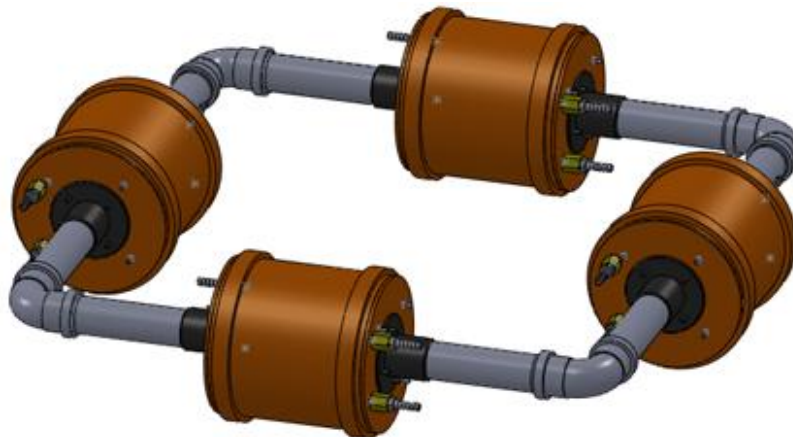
Thermoacoustic engine prototype assembled with four pressure vessels
